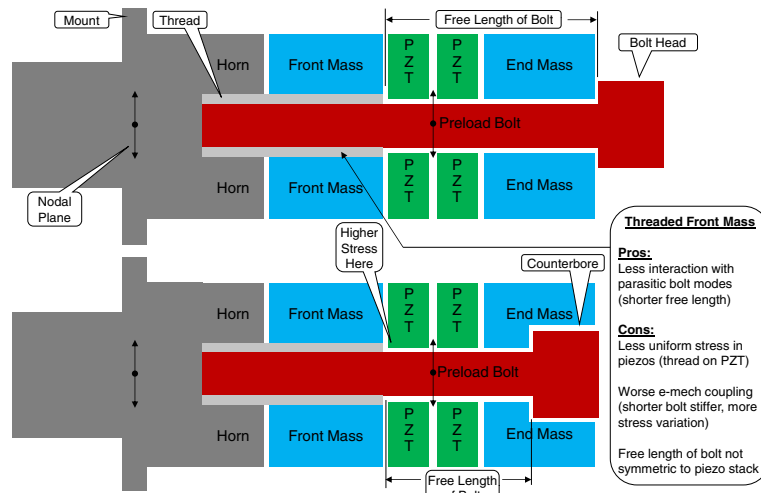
Pros and cons of a threaded front mass configuration for preload screw.
